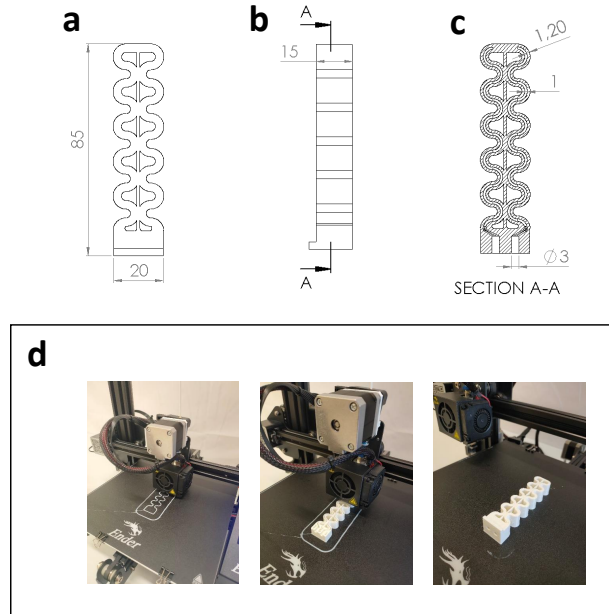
Proposed soft actuator design. (a) Front view. (b) Side view. (c) Split view of the soft actuator, showing the two opposing pneumatic chambers. (d) Soft actuator 3d printing process. Bottom print, air chambers and top printing, respectively.
